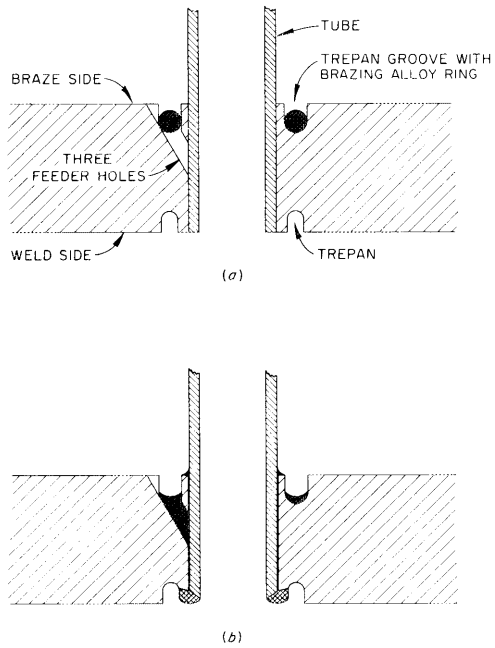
Present Method of Joining. (a) Before and (b) after brazing and welding.
